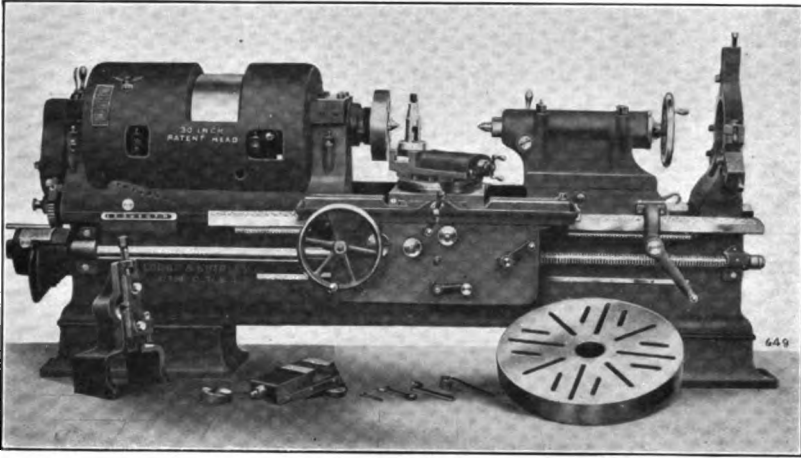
LODGE &amp; SHIPLEY 30-INCH PATENT HEAD LATHE.
